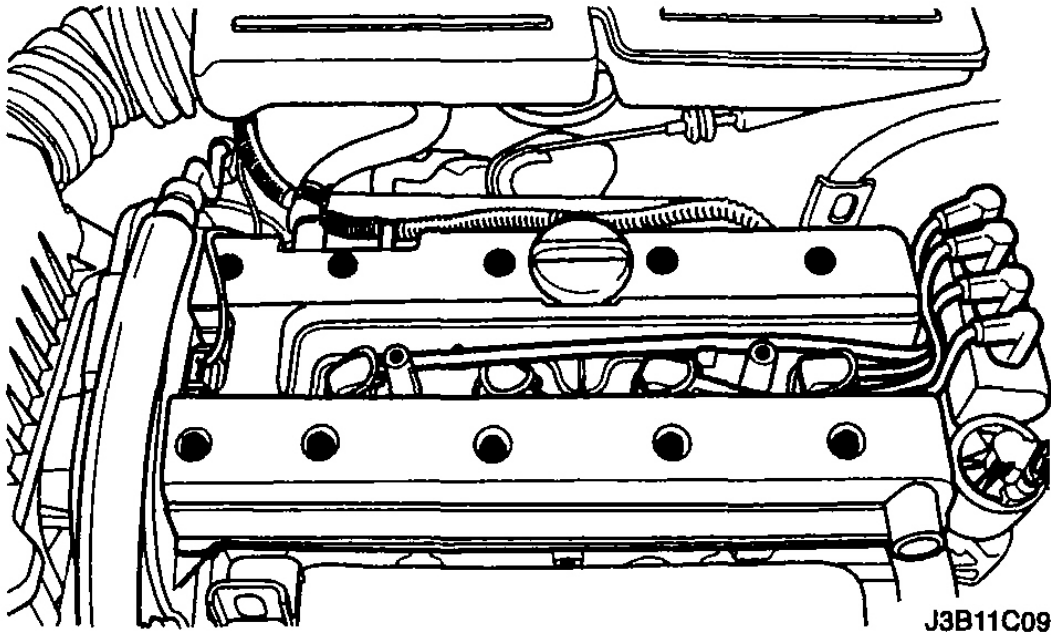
Installing Camshaft Cover And Camshaft Cover Gasket
